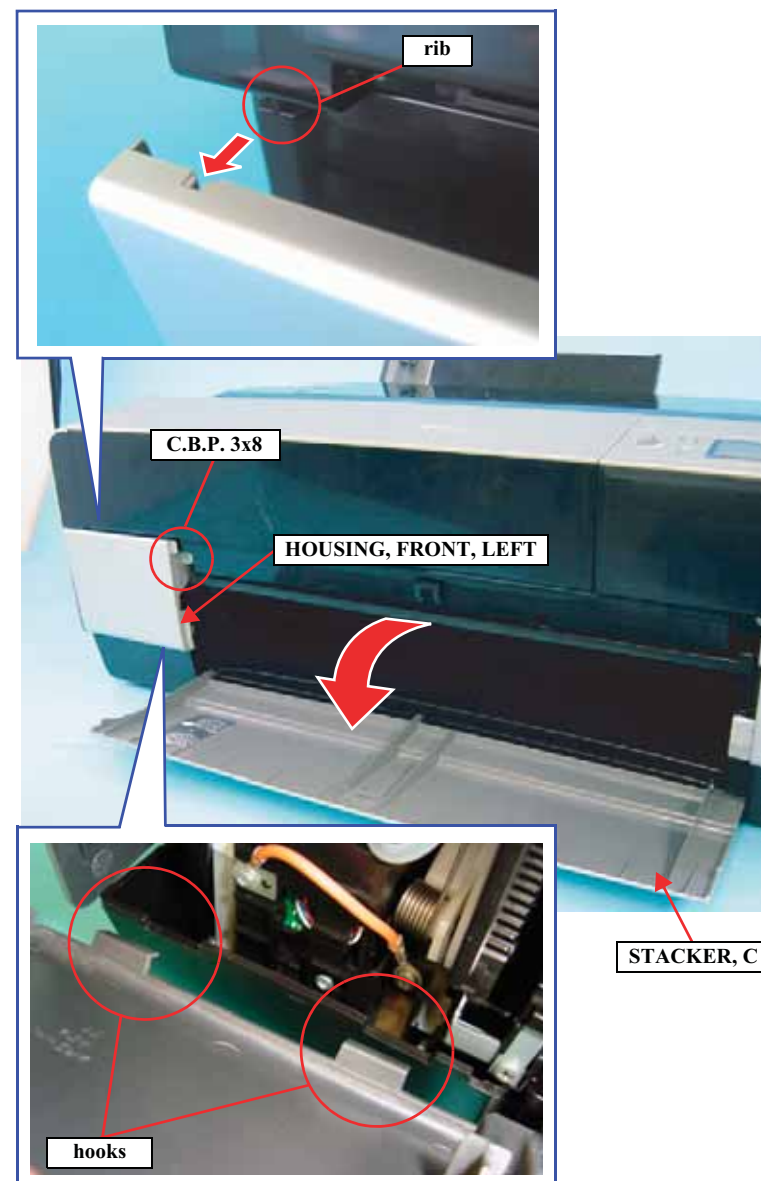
Removing the HOUSING, FRONT, LEFT
